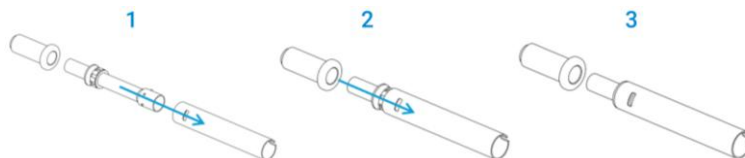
Illustrated view showing the reassembly of the ceramic outer tube-set
